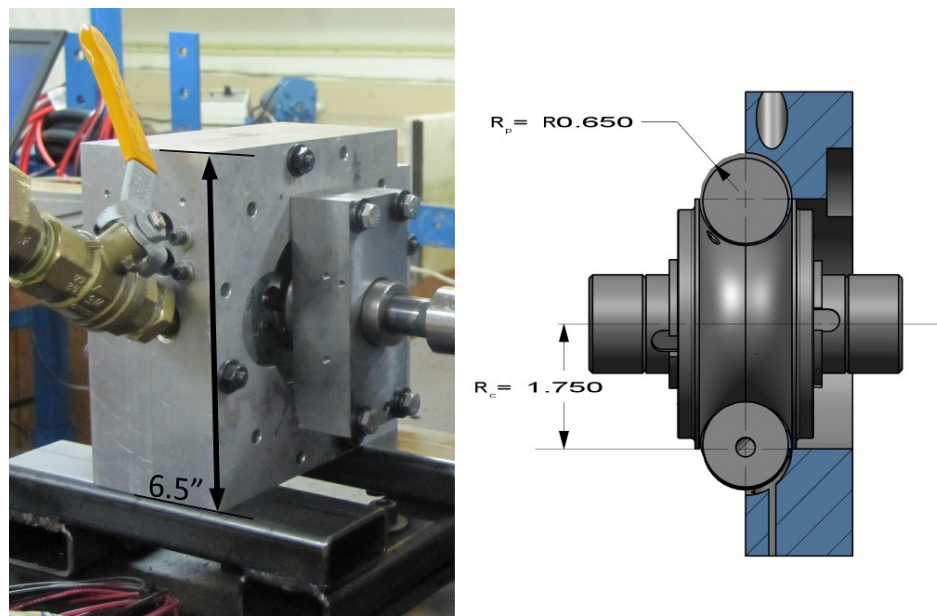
Motor size, piston radius (R_p), and piston offset (R_c).
